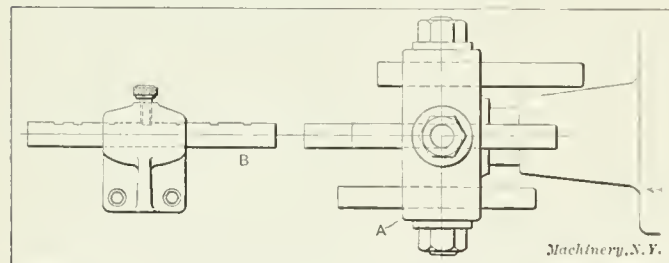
Rotating Dead Stops used on a Turret Lathe Cross-slide
